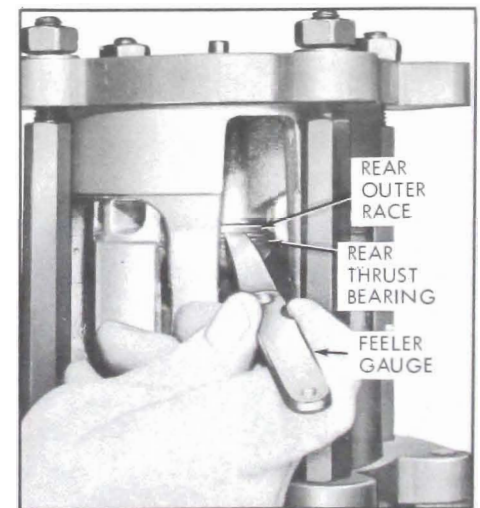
Gauging Clearance Between Rear Thrust Bearing and Rear Outer Race
